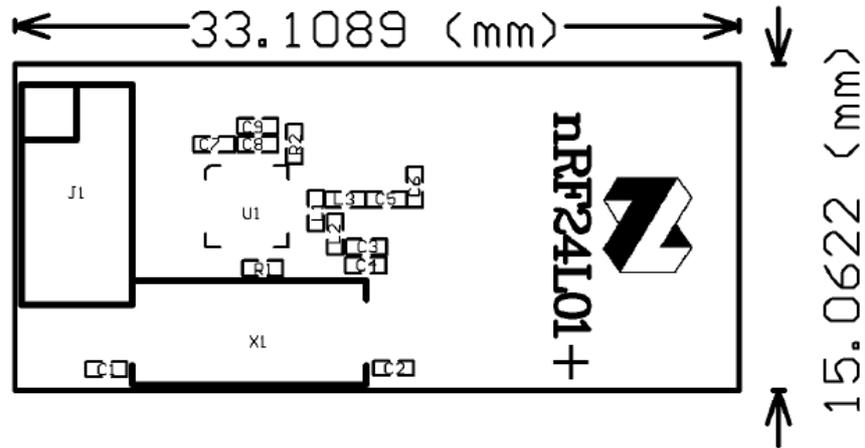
Top overlay (nRF24L01+ RF layout with single ended connection to PCB antenna and 0402 size passive components)
